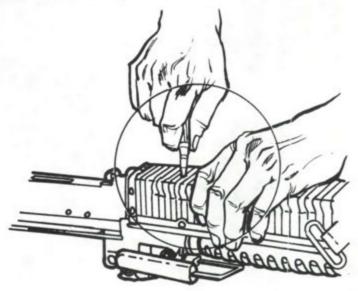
Removing the forearm assembly. 2-III-E-1.7
